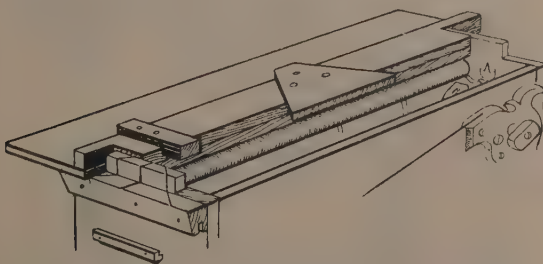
SHOWING AUXILIARY SHOOTING BOARD READY FOR USE.
